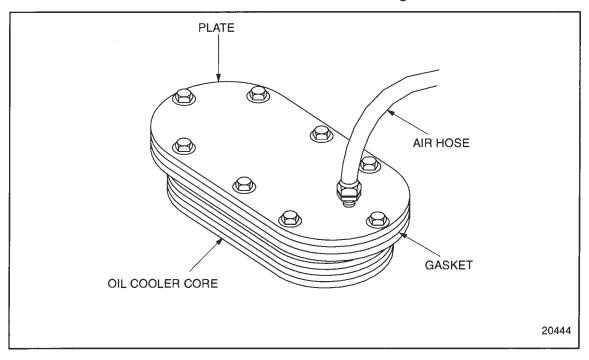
Preparing Oil Cooler Core for Pressure Test
